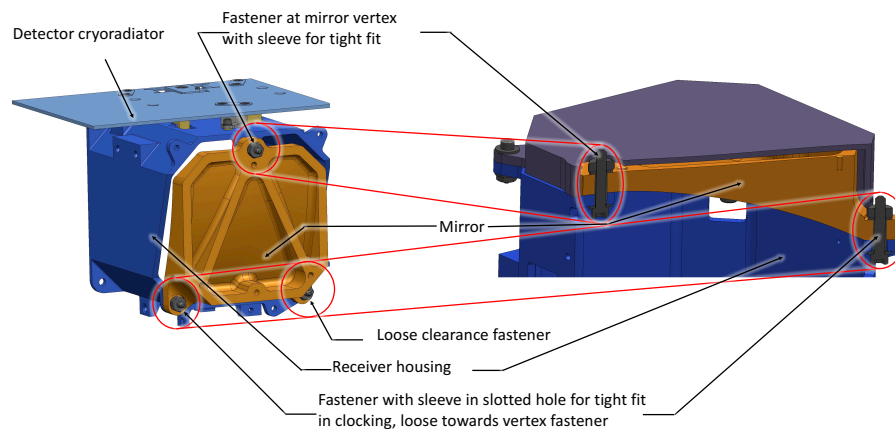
Receiver module with cryoradiator (left) and section view (right) showing fastener detail of semi-kinematic snap-together design (figure updated from [41]).
